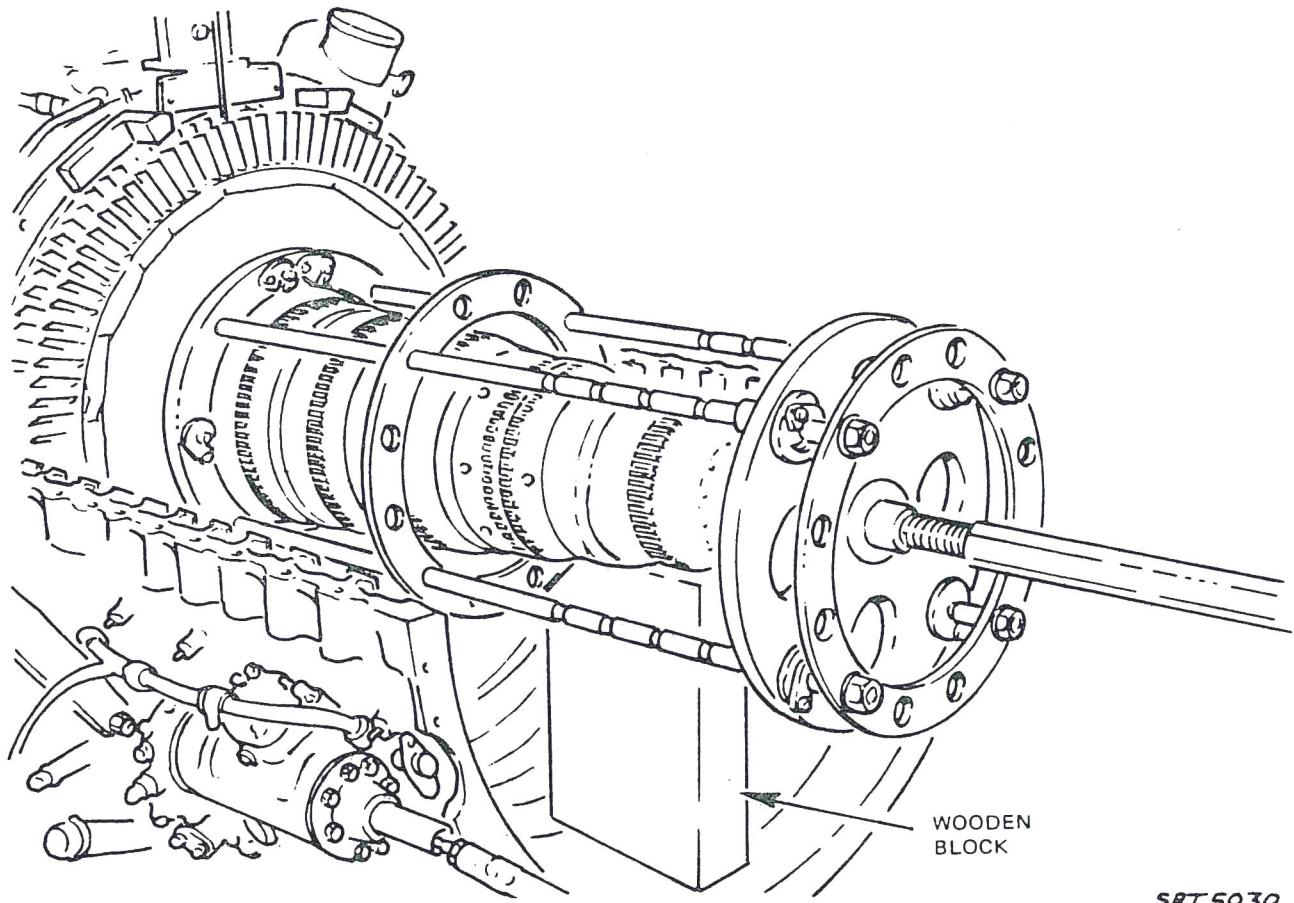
Extractor - Withdrawing tool (Long) Stages 6 to 11 rotor wheels
